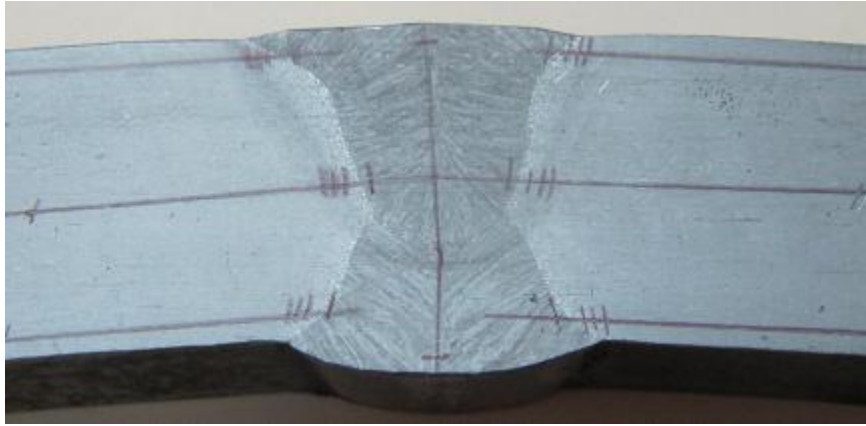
Cross Section showing the macrograph of the spiral weld joint
